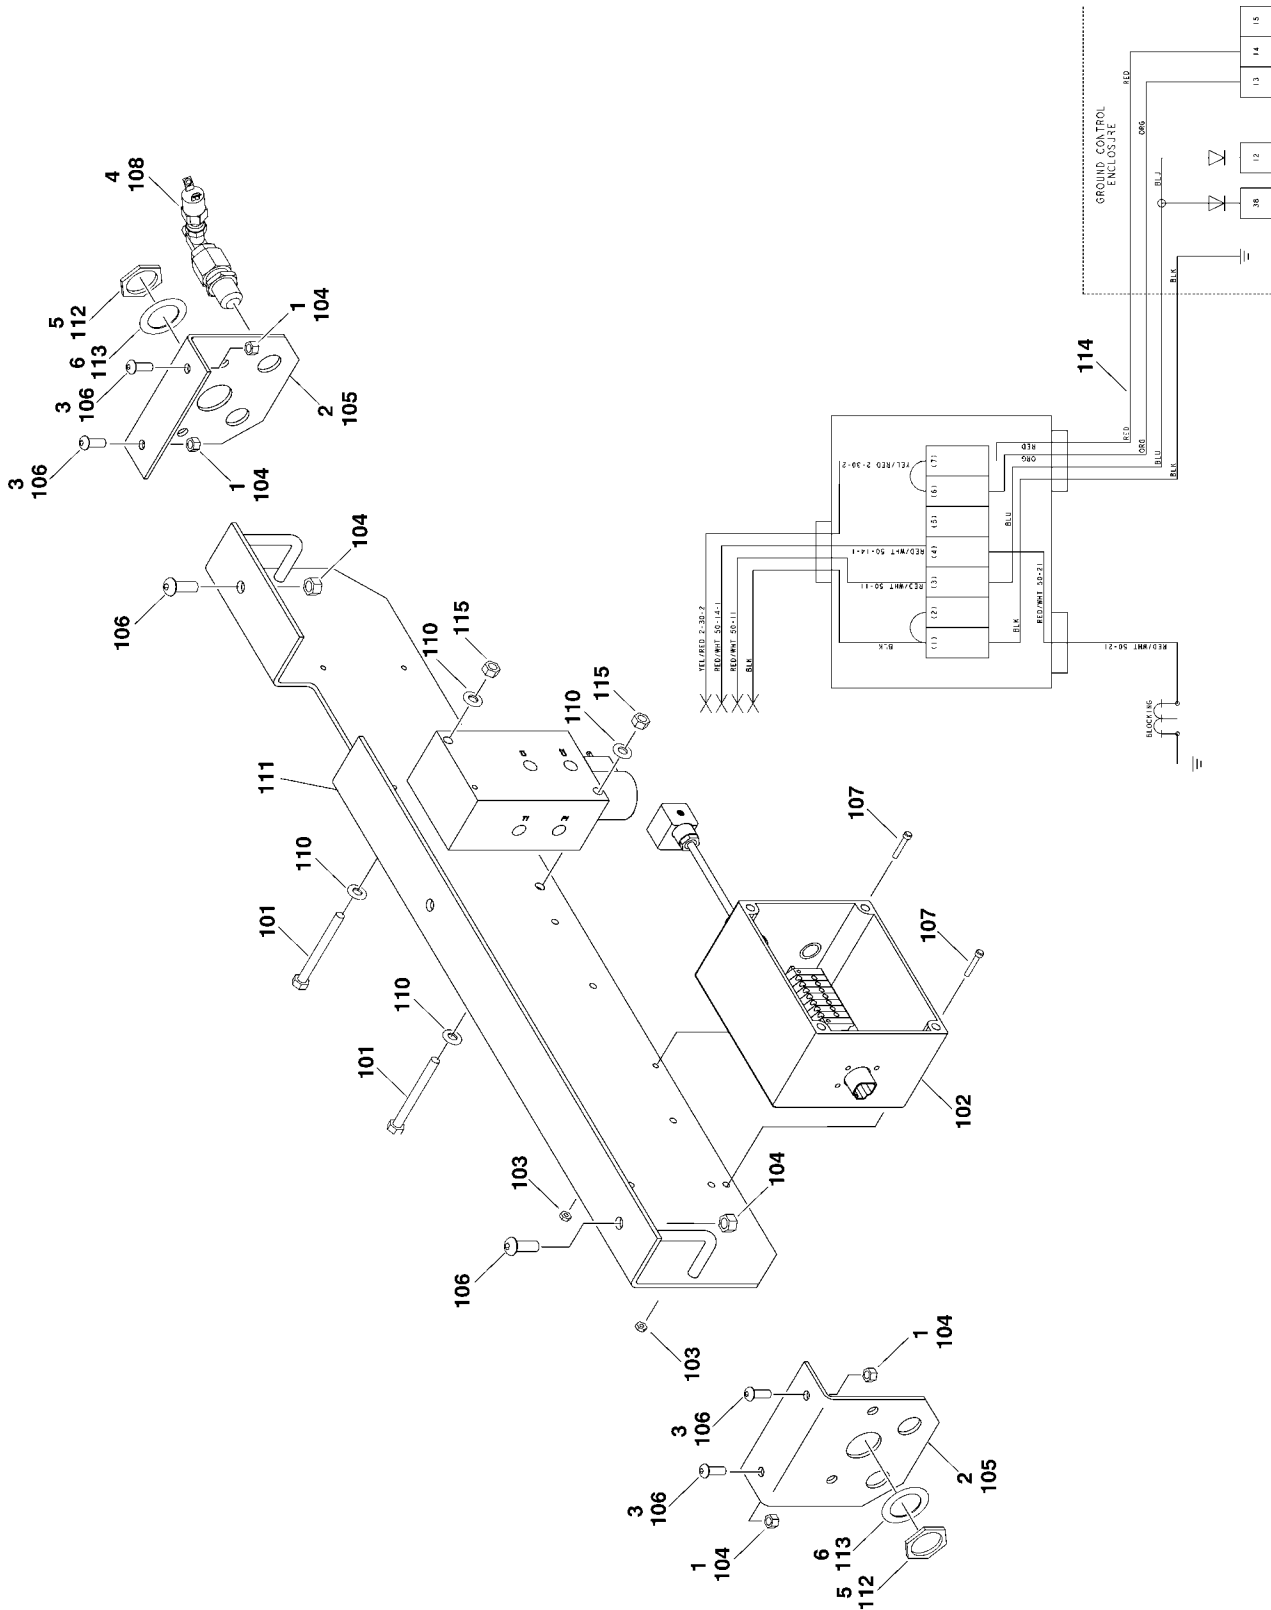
Easi-Cladder™ Plus Bulkhead & Vacuum Switch Diagram Parts
